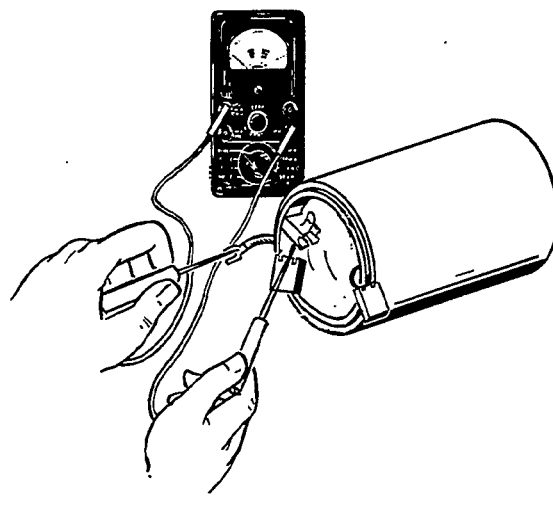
FIELD COIL OPEN CIRCUIT TEST
